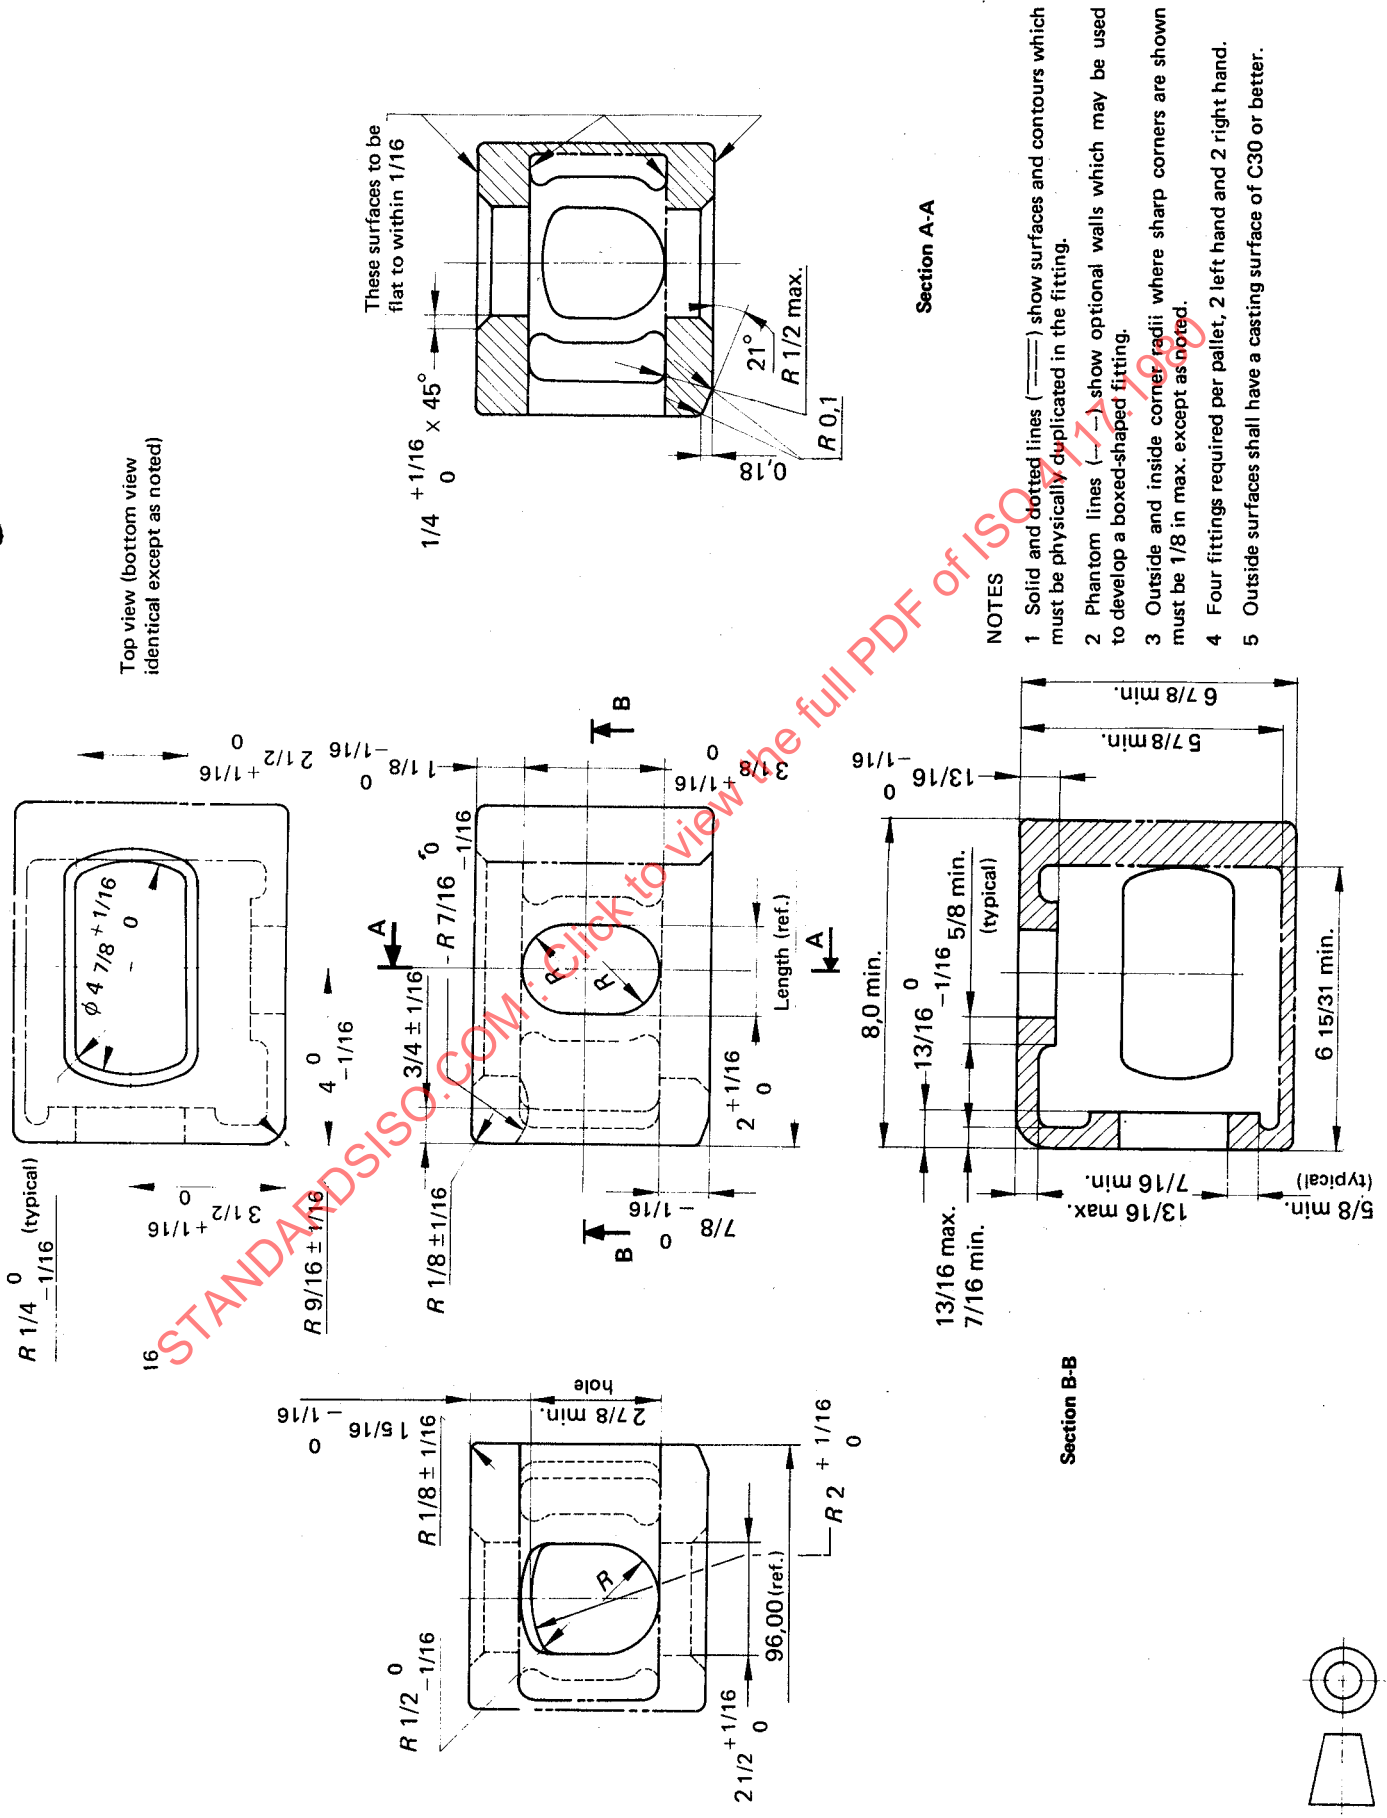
A — Recessed corner fitting — Dimensions in inches (see figure 8)
